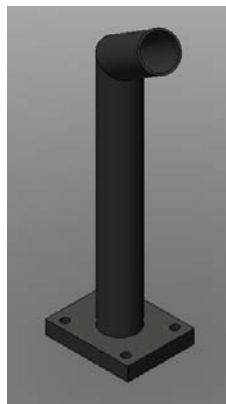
Stainless steel exhaust pipe and welded flange
